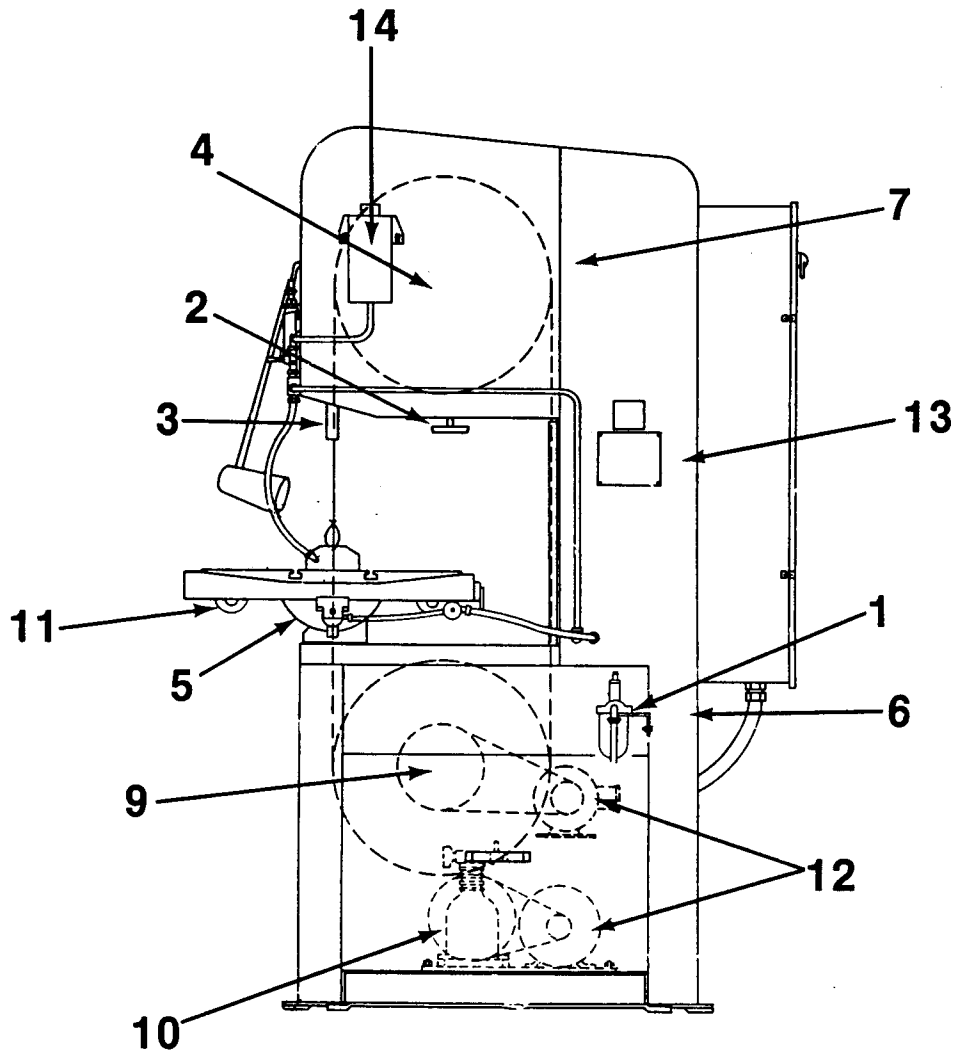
OIL MIST LUBRICATOR SYSTEM.
